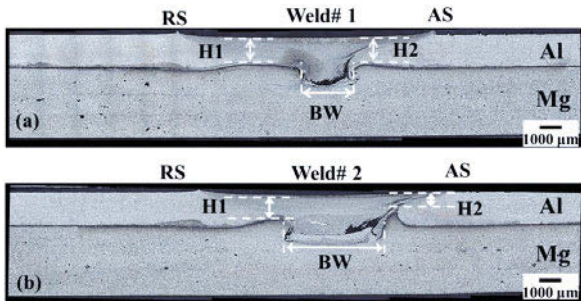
Cross-sectional views of the untested dissimilar FSLW aluminum-to-magnesium (a) weld 1 and (b) weld 2.
